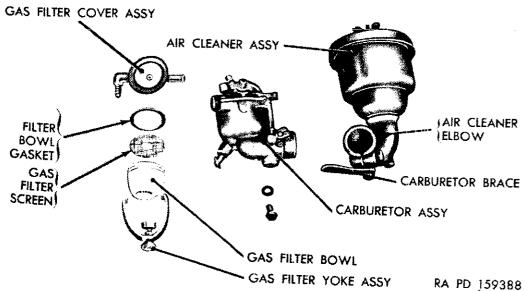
Power charger (carburetor, gas filter, and air cleaner removed).
